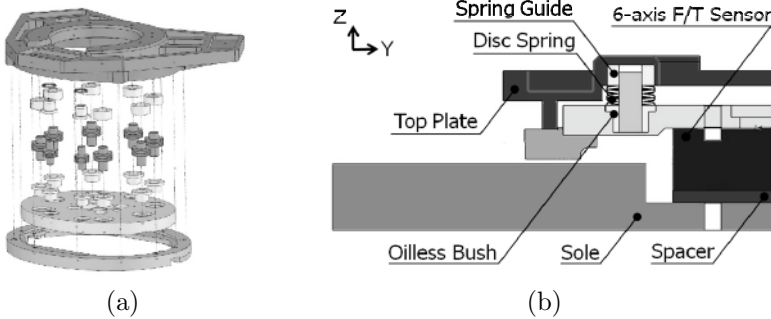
Overload protection mechanism: (a) Exploded view of the overload protection mechanism; (b) Detail view of the overload protection mechanism.
